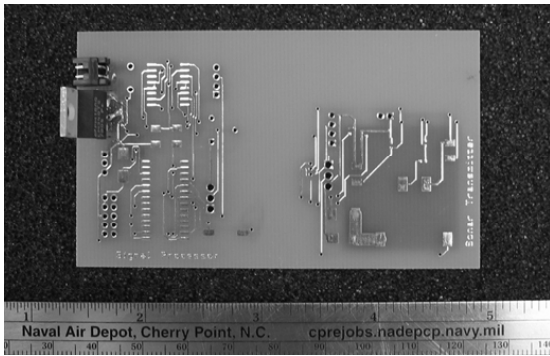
Top Layer of Altimeter Printed Circuit Board
